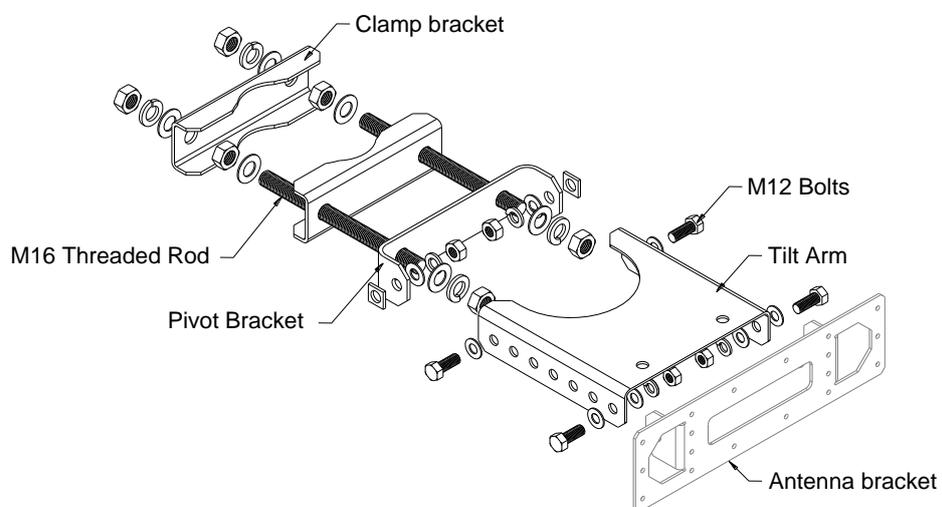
With Tilt Arm Mounting Bracket Exploded Assembly
